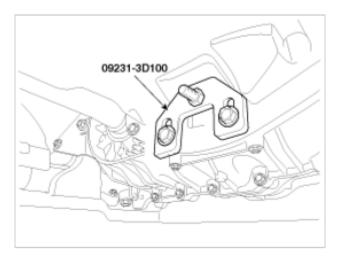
Installing SST (09231-3D100) Using Mounting Bolts
